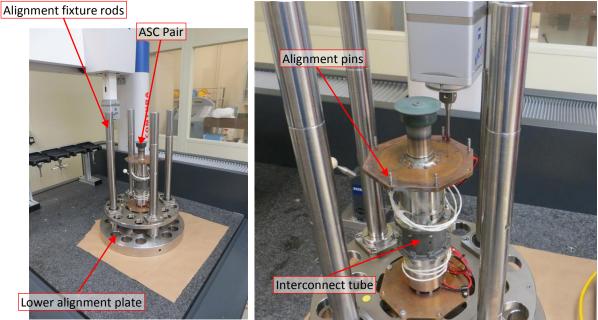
Measuring CSAF flatness, parallelism, and distance on CMM, with the convertors installed in the alignment fixture.
